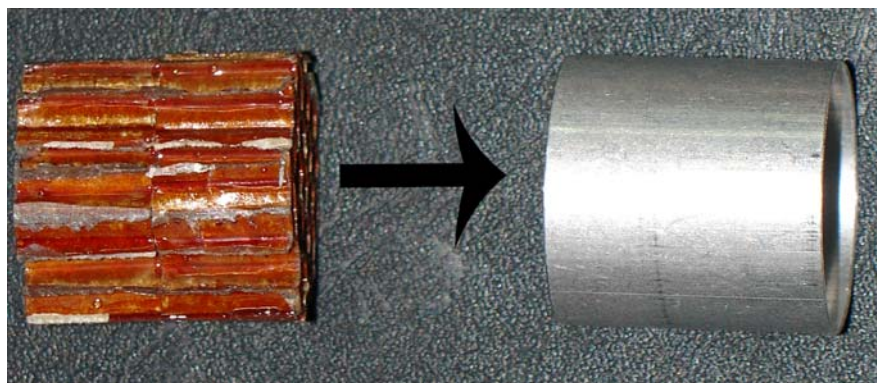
Filling the empty Al tube with a honeycomb filler
